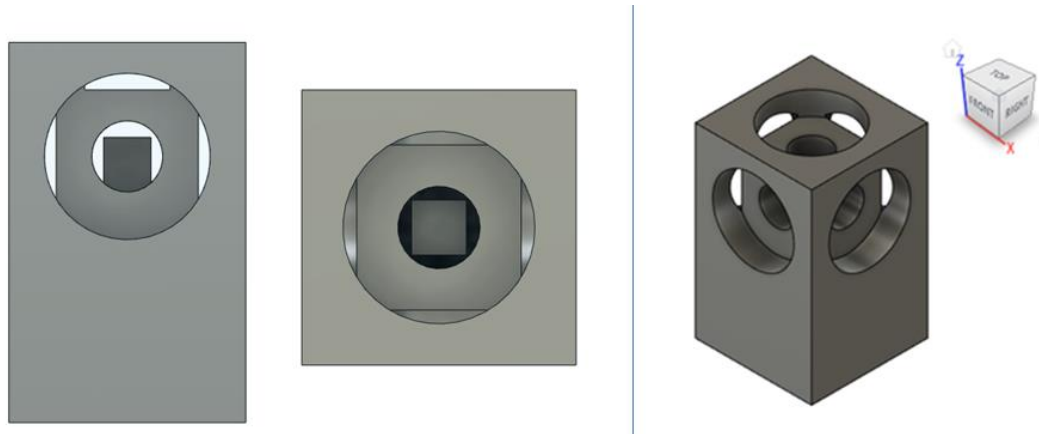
Part 3 Using 3+2-Axis with block dimensions of 80x50x50 mm
